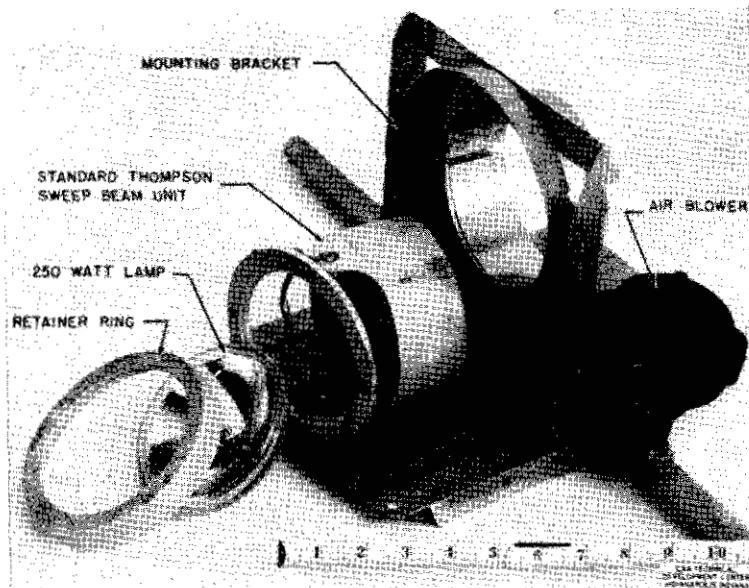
Disassembled View of the 250-Watt Sweep-Beam Installation
